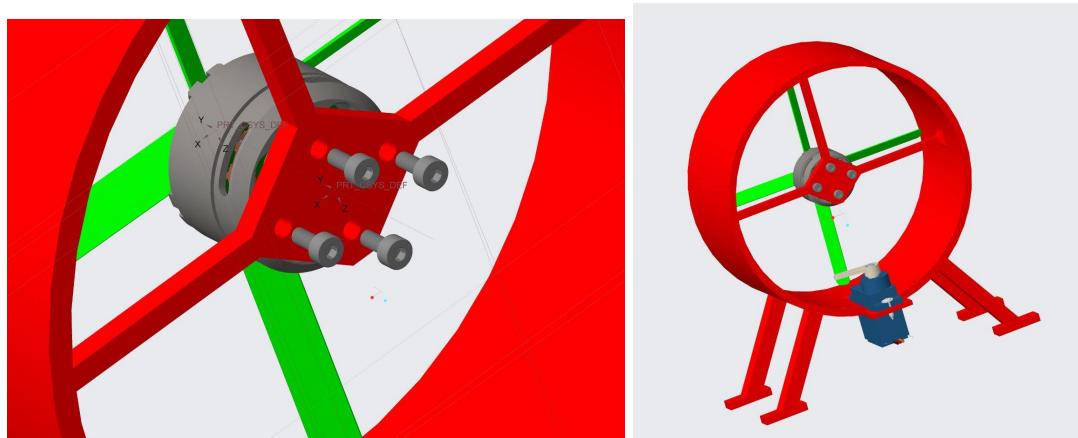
Brushless motor and Propeller assembly and Propulsion Motor Mount
